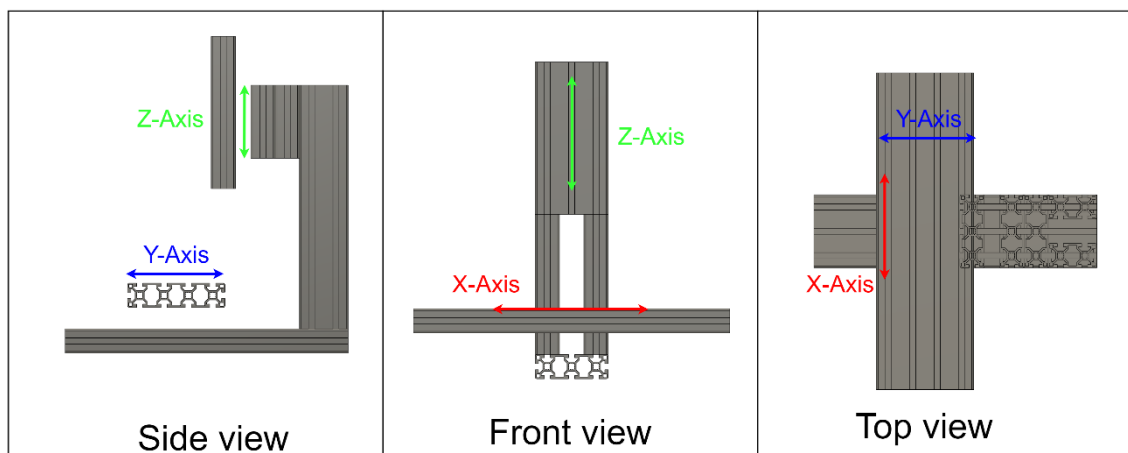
Mill frame mock-up, first concept using T-Slot extrusions, side, front and top view along with the axis's directions.
